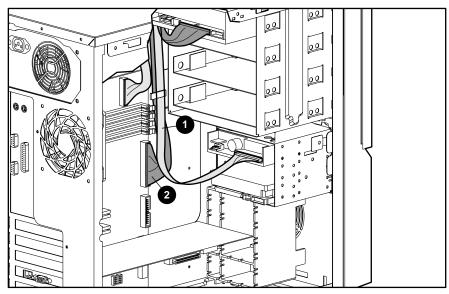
Diskette drive cable and IDE CD-ROM drive cable routing
